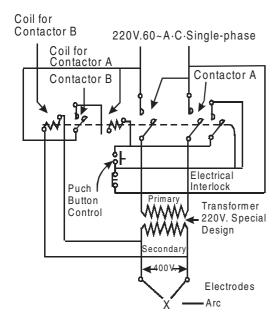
Circuit diagram of apparatus used with atomic hydrogen welding torch.
